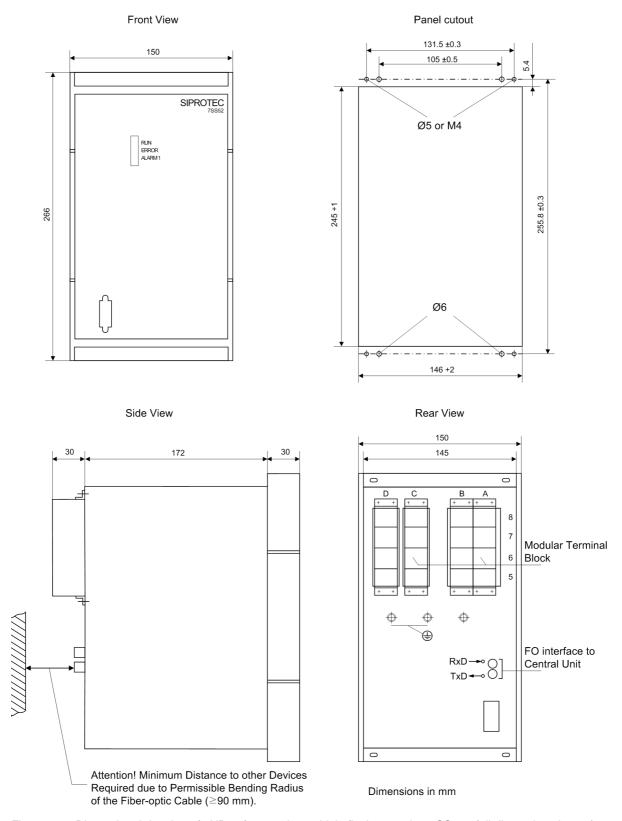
Dimensional drawing of 7XP20 for panel or cubicle flush mounting 7SS525 (all dimensions in mm)
